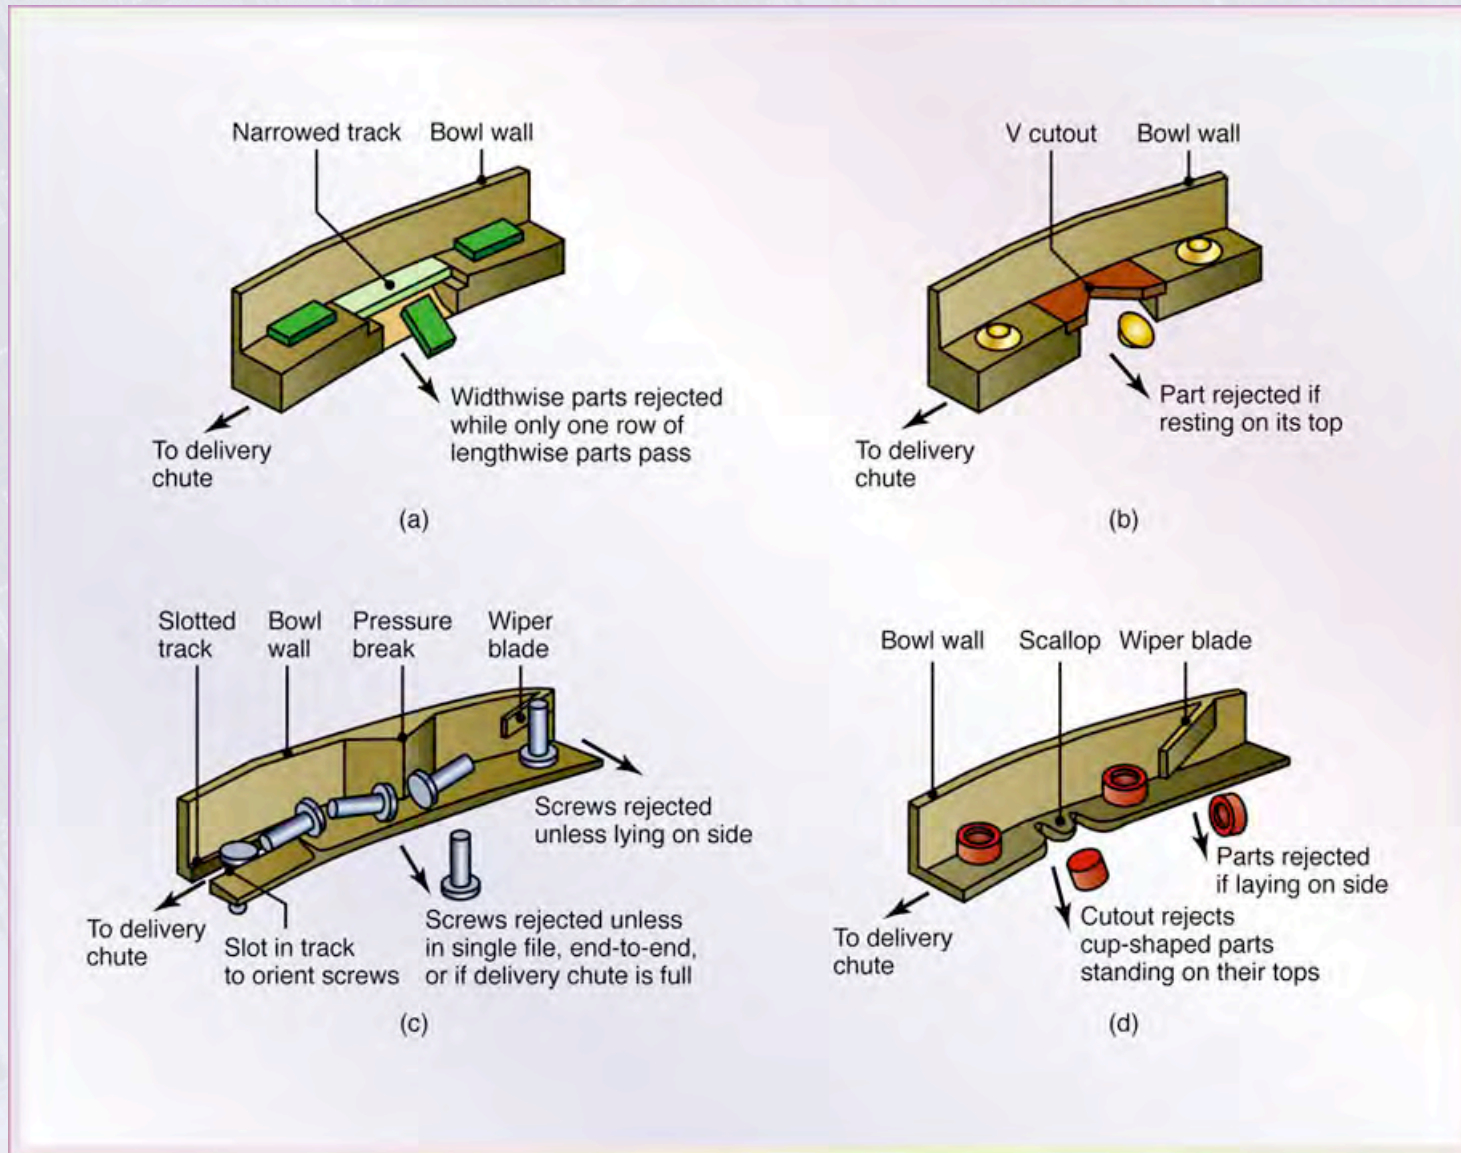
Examples of guides to ensure that parts are properly oriented for automated assembly. *Source:* After G. Boothroyd.
